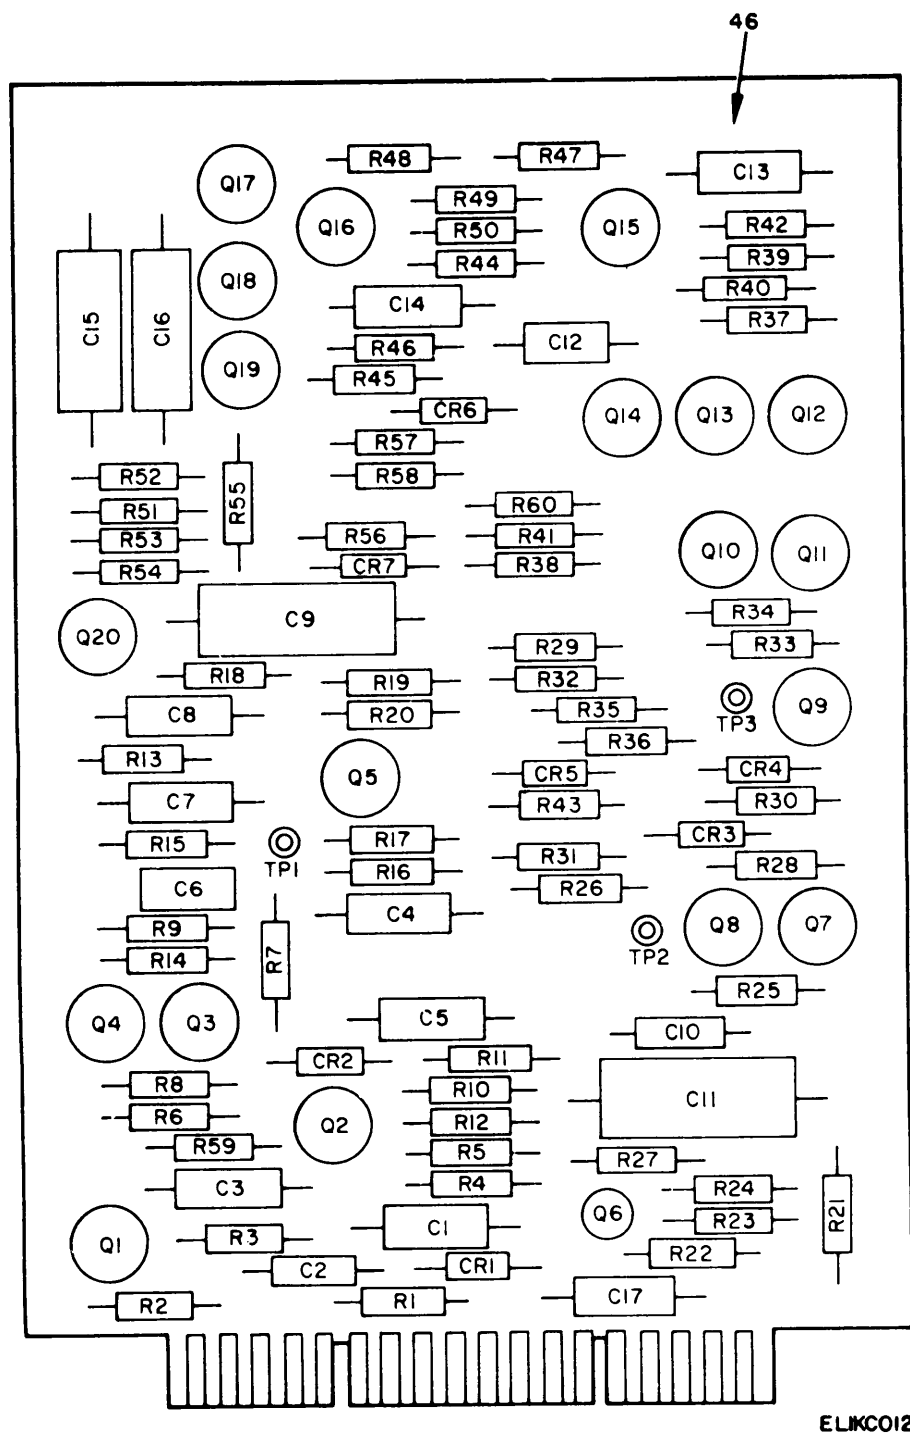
Receive Card 1A3 (Sheet 1 of 2).
